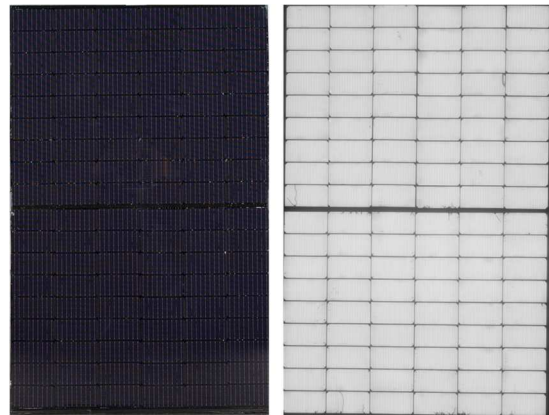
Full-size glass/glass module with butyl edge sealant – front side photo (left) and EL image (right; 1sec @9A). The module was built using the semi-automated TECC wire stringing machine with half-cut M6 HJT solar cells.
